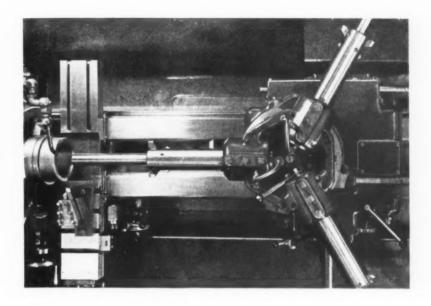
Universal Turret Lathe Equipped for the Next Operation, in which the Cylinder Barrels are Finish-bored and Chamfered, and Finish-faced on the Crankcase End after Normalizing
